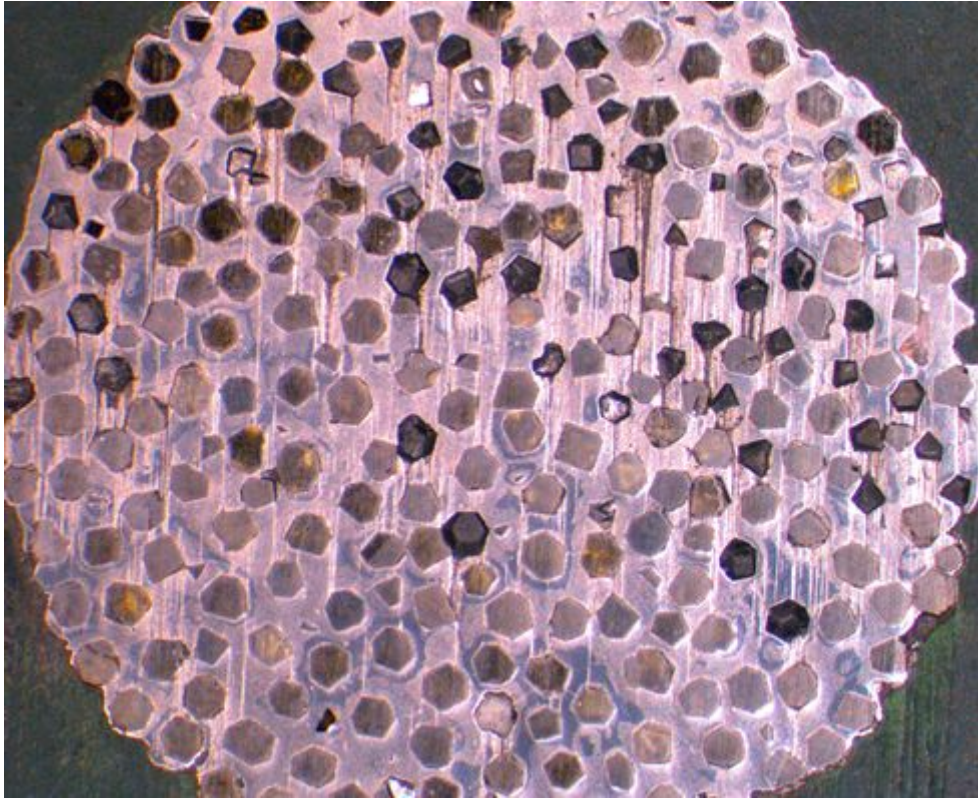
Photo shows the horizontal cross-section of a BD-SP DTM insert.
